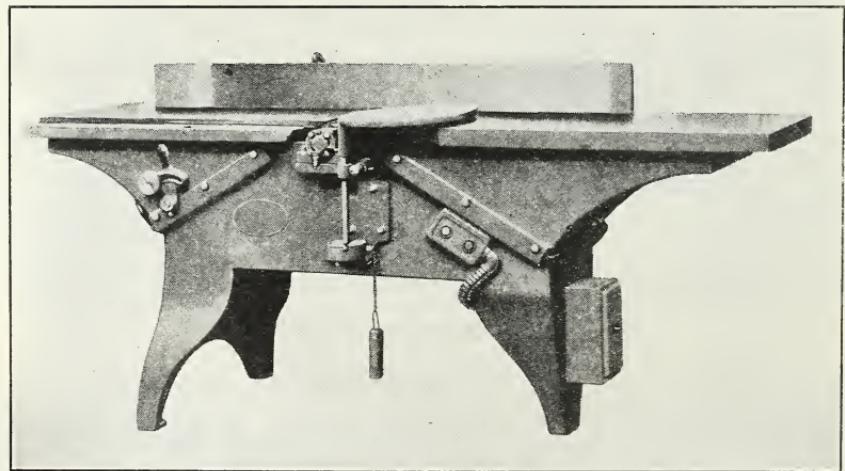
A hand jointer is essential in a modern dimension-stock plant.
